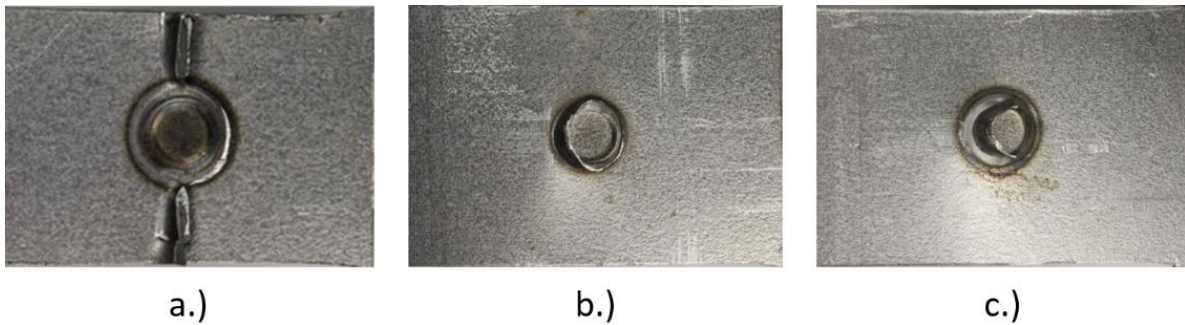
Typical failure modes: (a) “half” plugging with base material failure (long-time welding), (b) fully plugged (2-pulses technology), (c) partially plugged (short-time welding)
